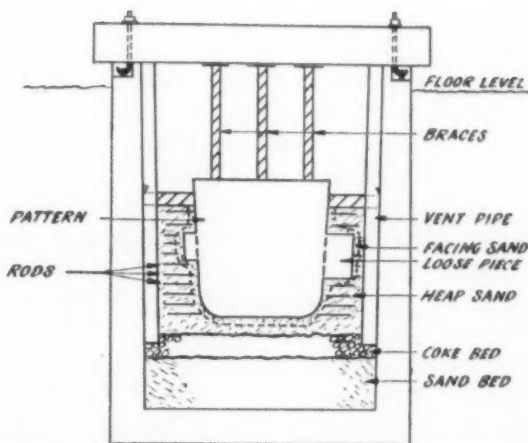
VIEW OF CASTING PIT SHOWING RODS PLACED DURING RAMMING TO HOLD THE SAND AND PREVENT ITS TEARING WHEN PATTERN IS DRAWN.
